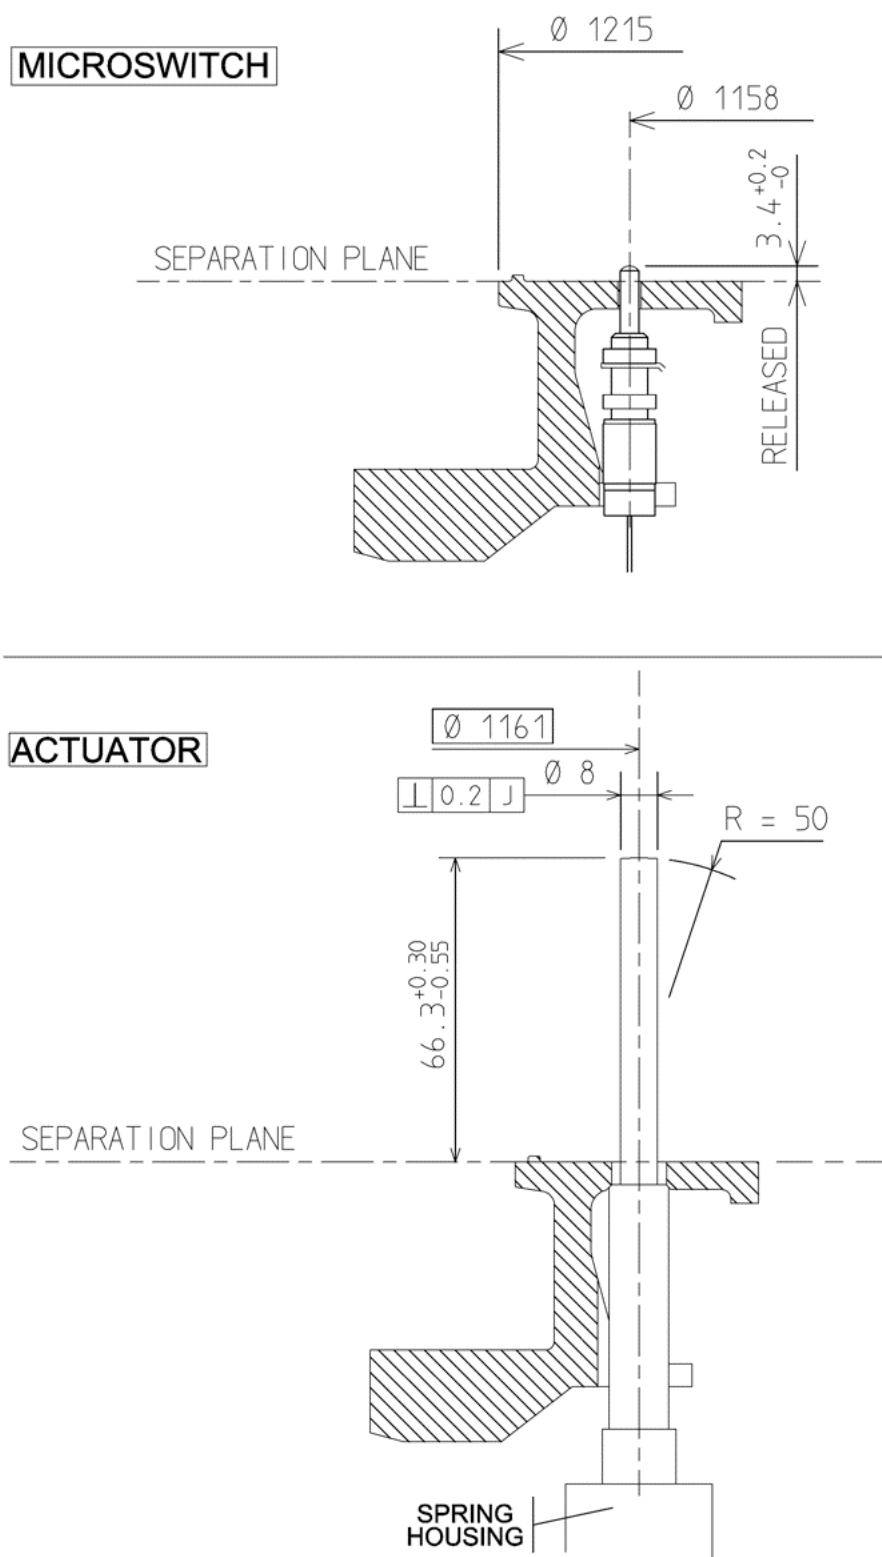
Adaptor 1194H - Mechanical interfaces (details)
